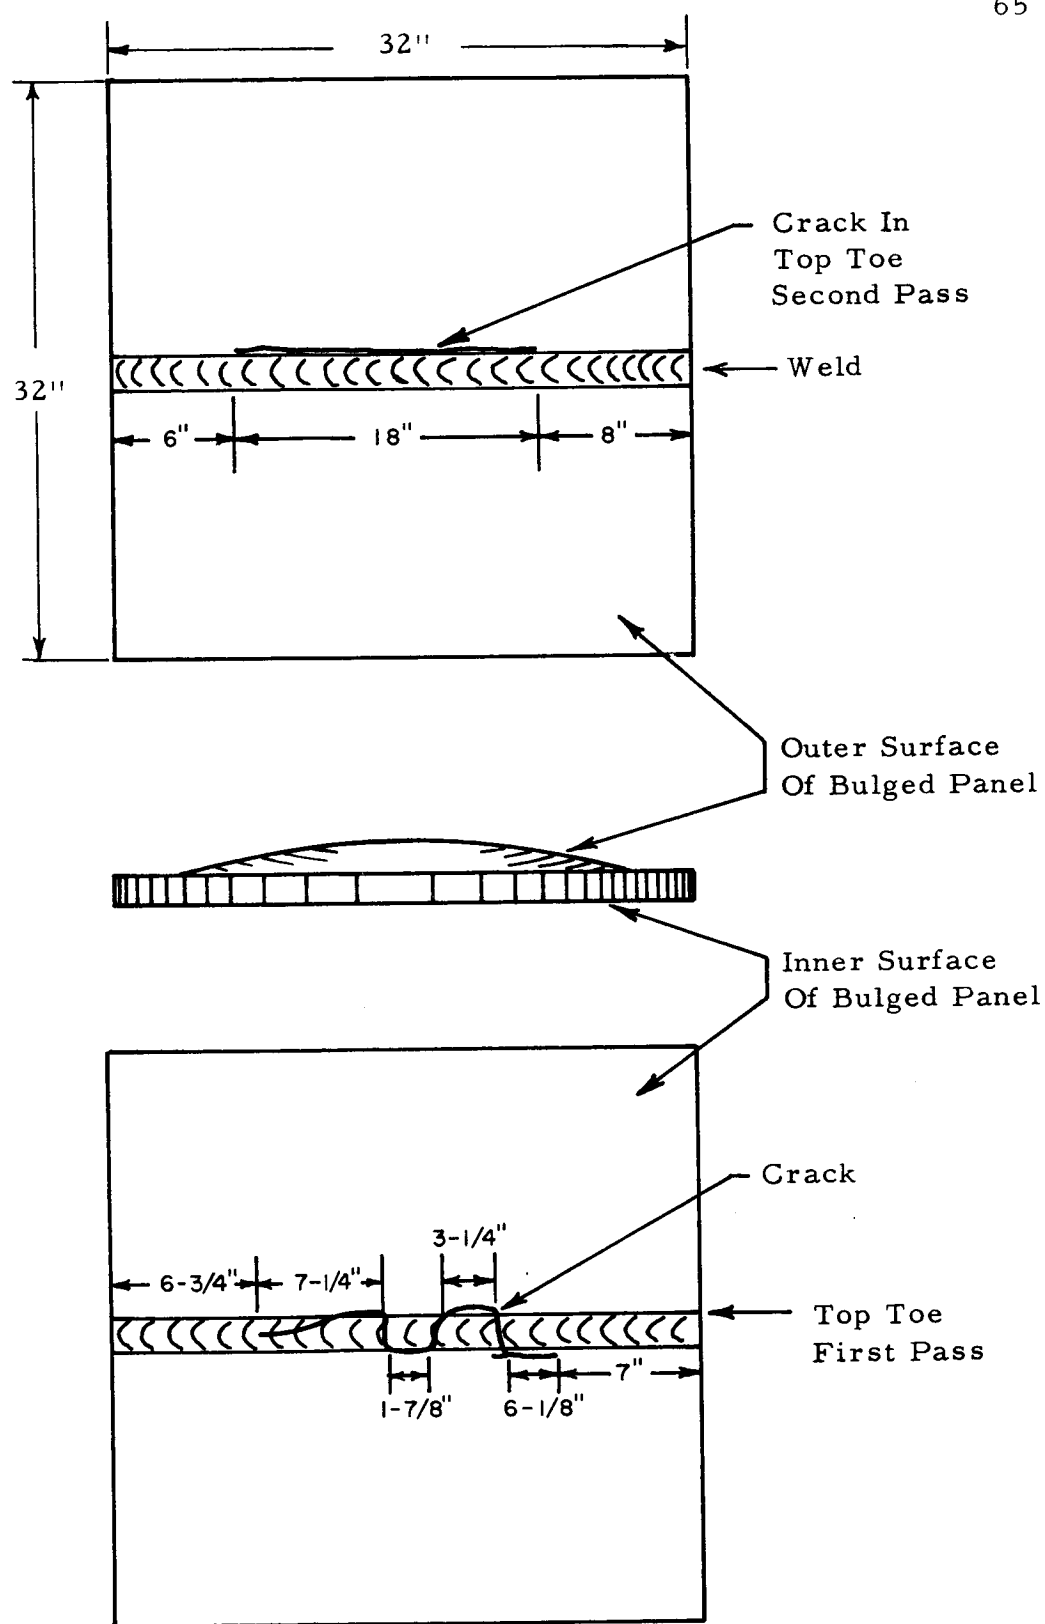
LOCATION AND MEASUREMENTS OF SURFACE CRACKS IN PANEL C
